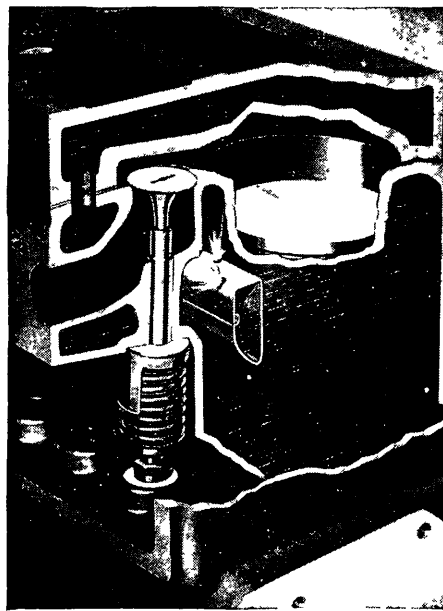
Showing how water is sprayed through holes in distributor tube to cool exhaust valve seats, 1935-52
